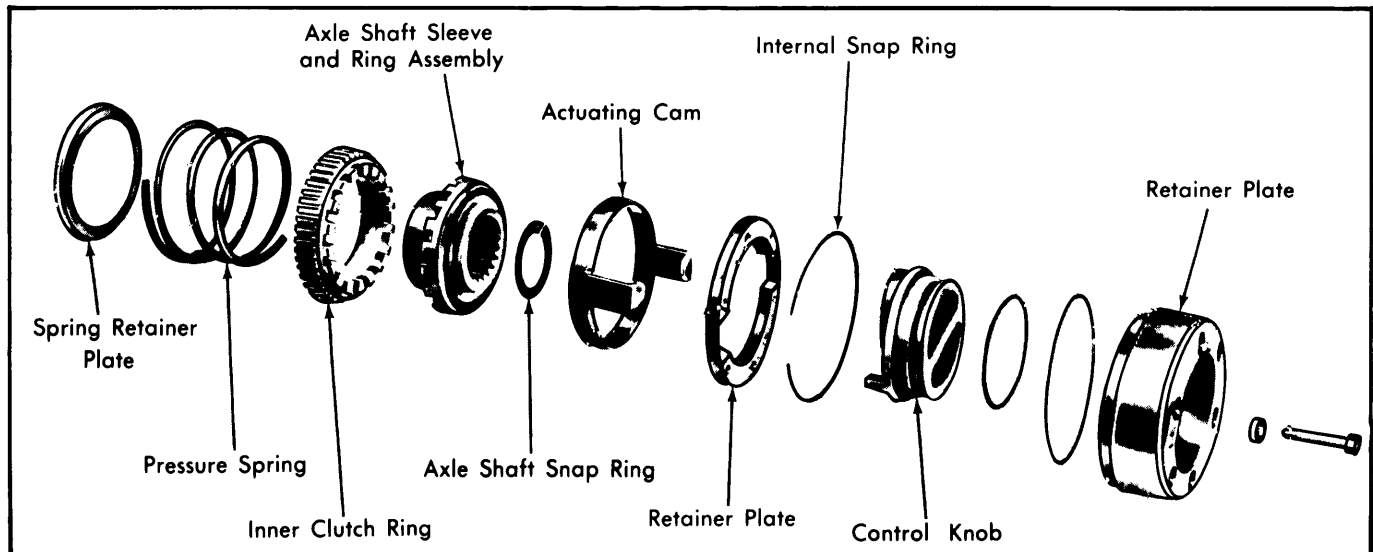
Exploded View of Dana/Spicer Internal Locking Hub
